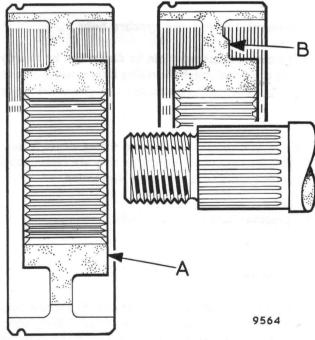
Position of 1st/2nd hub, wider face 'A', to pinion head or, identification step 'B' to pinion head
